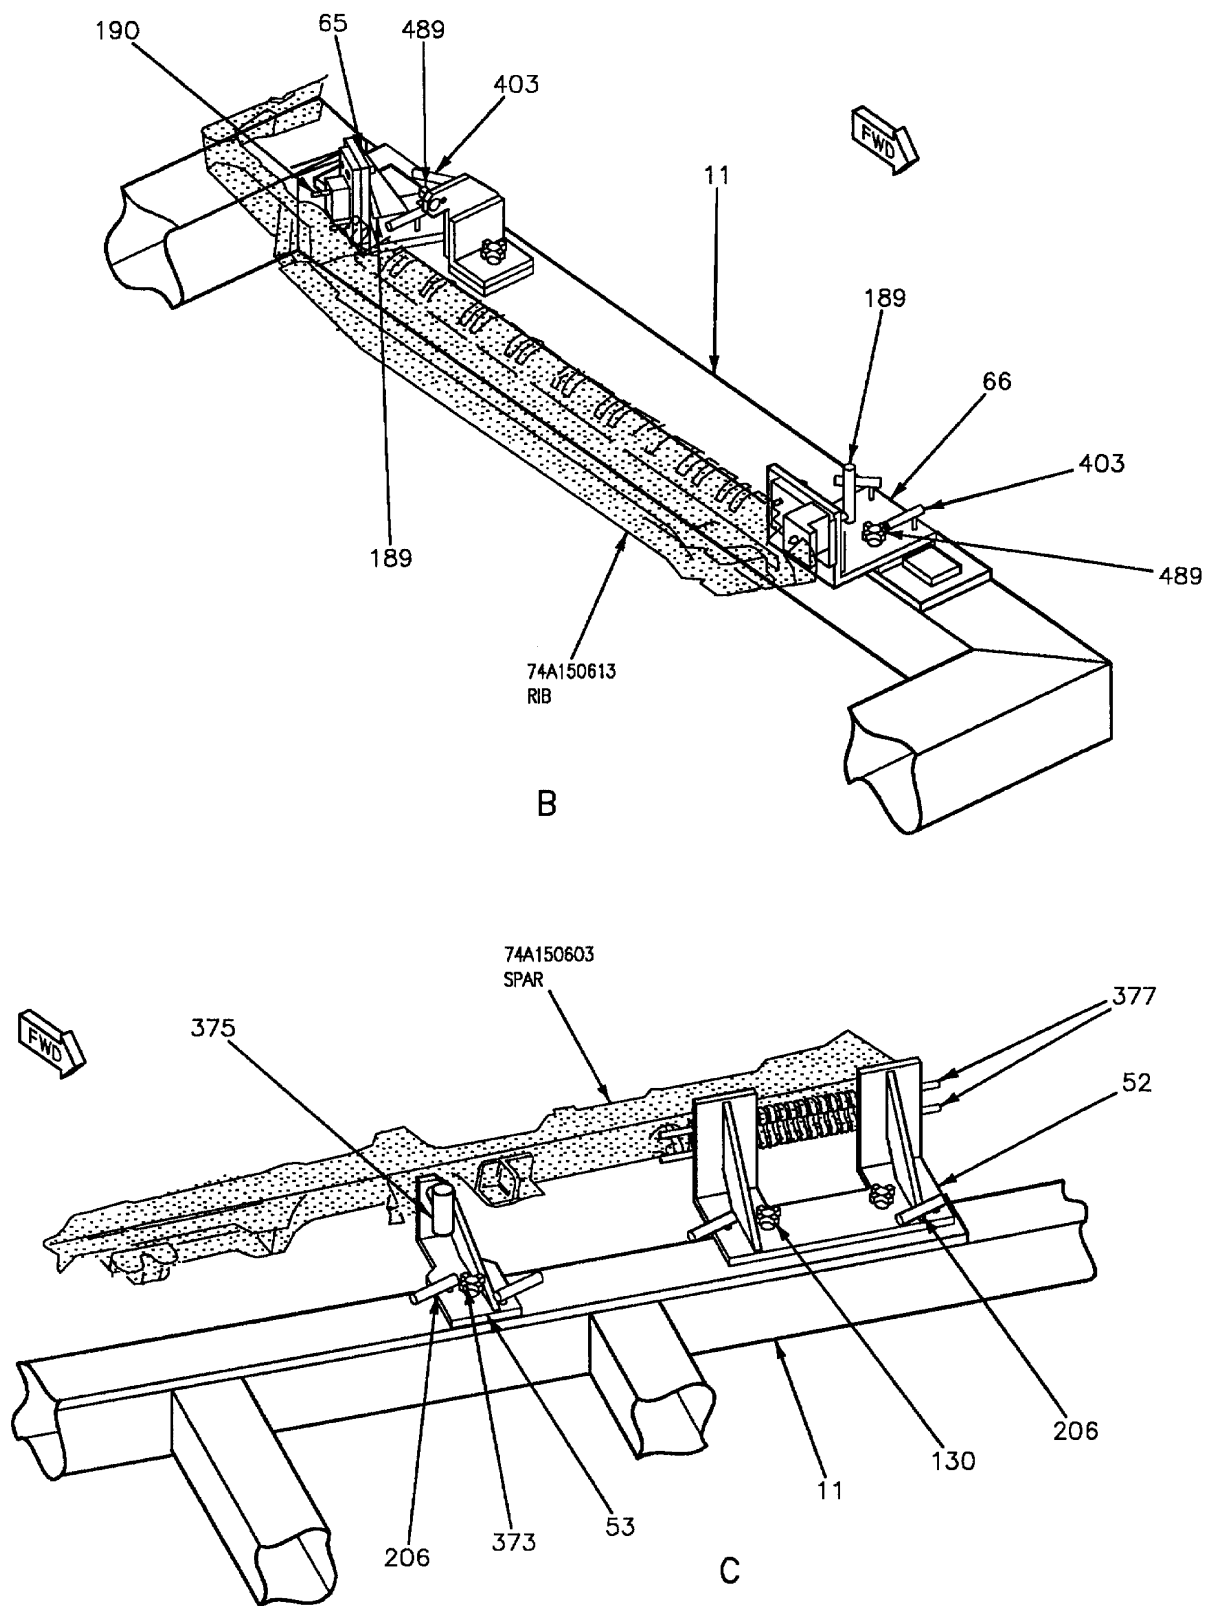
Installation of Outer Wing into Fixture (Sheet 3)
